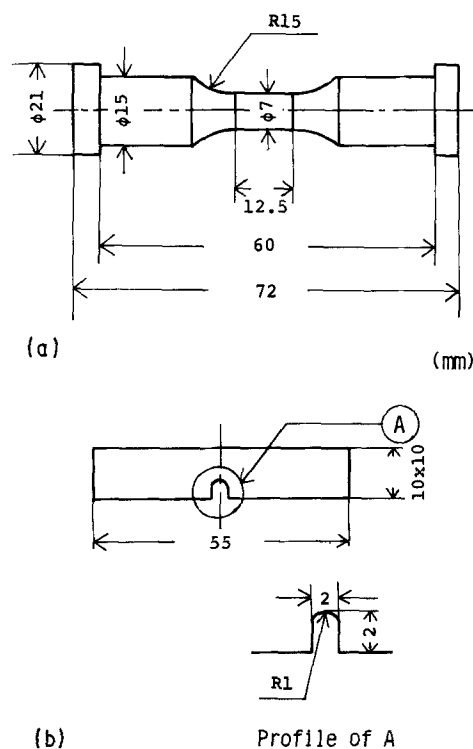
Shape and dimensions of test specimens. (a) tensile specimen, (b) Charpy impact specimen.
